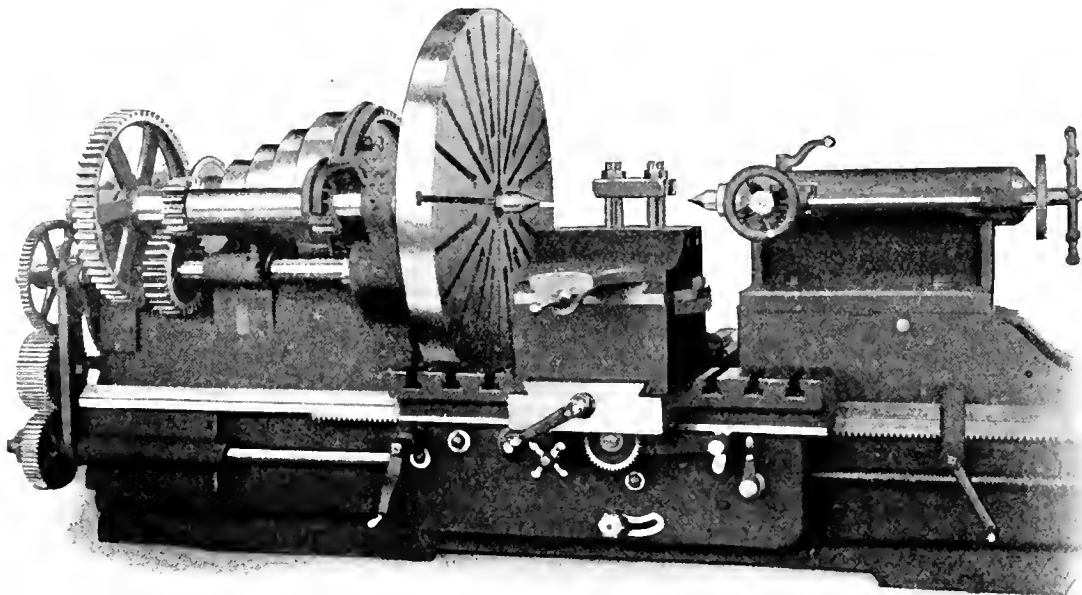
An Example of a New Line of Heavy Engine Lathes
